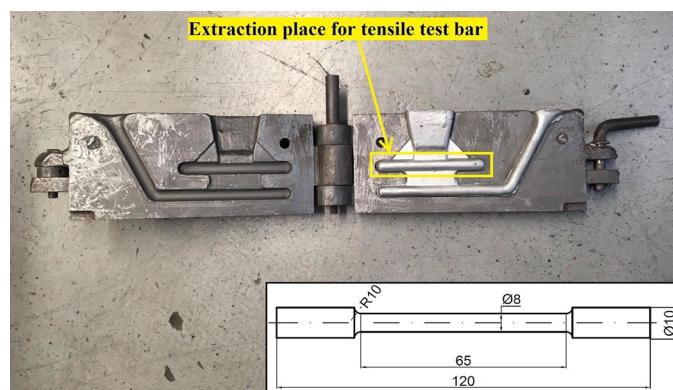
Scheme of the tensile test bar showing the extraction place from the casting
